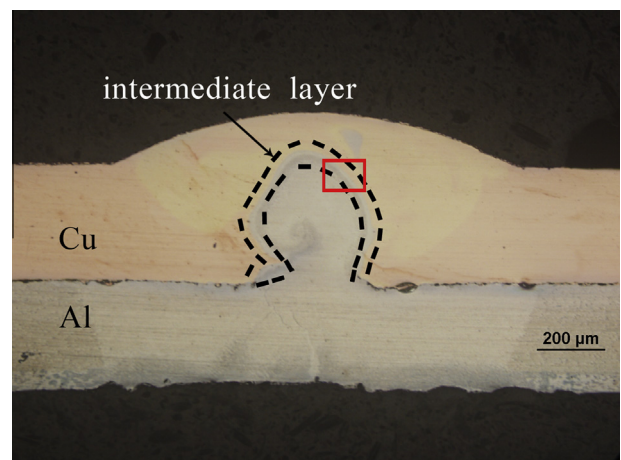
Micrograph of weld joint cross section (laser beam power 1650 W, welding speed 95 mm/s).
